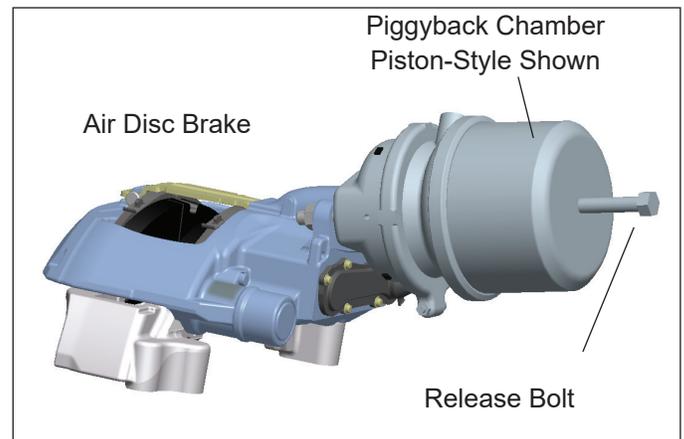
Air Disc Brake Showing Piston-Style Piggyback Spring Brake
